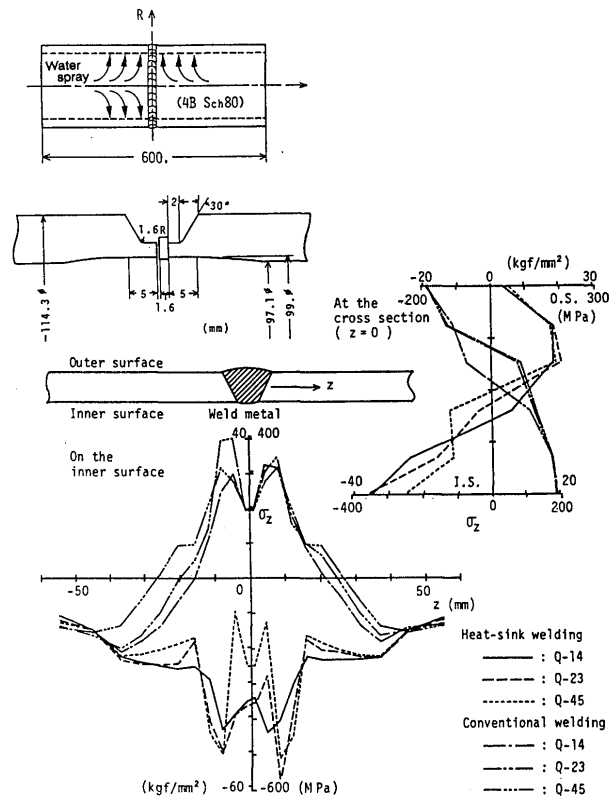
Mechanism of production of welding residual stress(Heat-sink method)
